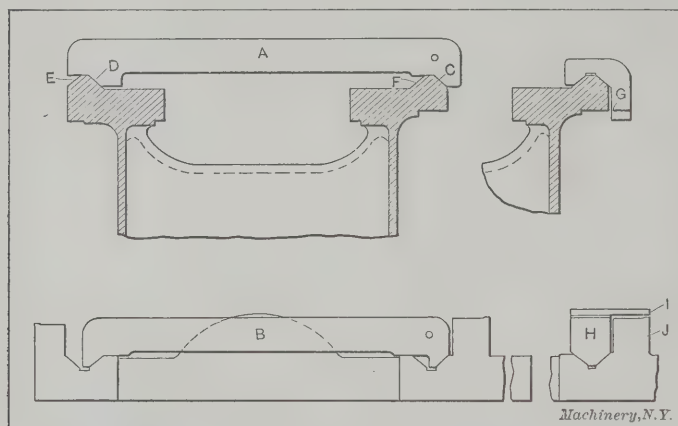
Gages for Testing the Planing of Lathe Bed and Carriage
